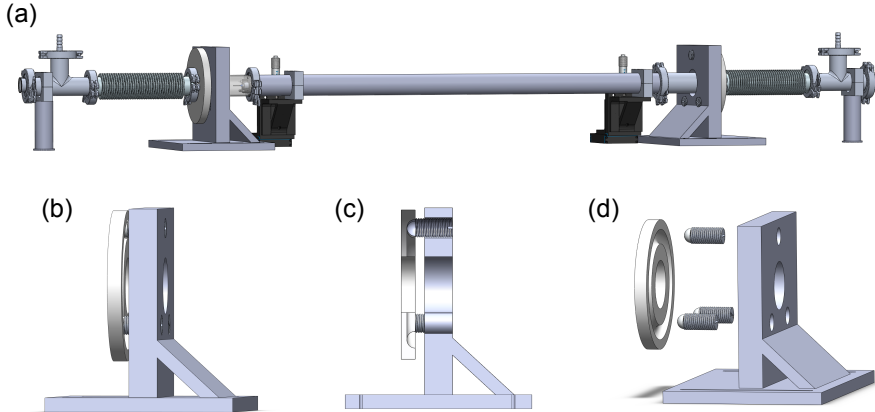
a) System allowing the capillary to be moved. b) Special holder preventing movement along the optical axis, but allowing tilt and translation in the perpendicular plane. c) Vertical cross section of the holder. d) The various components of the holder.
